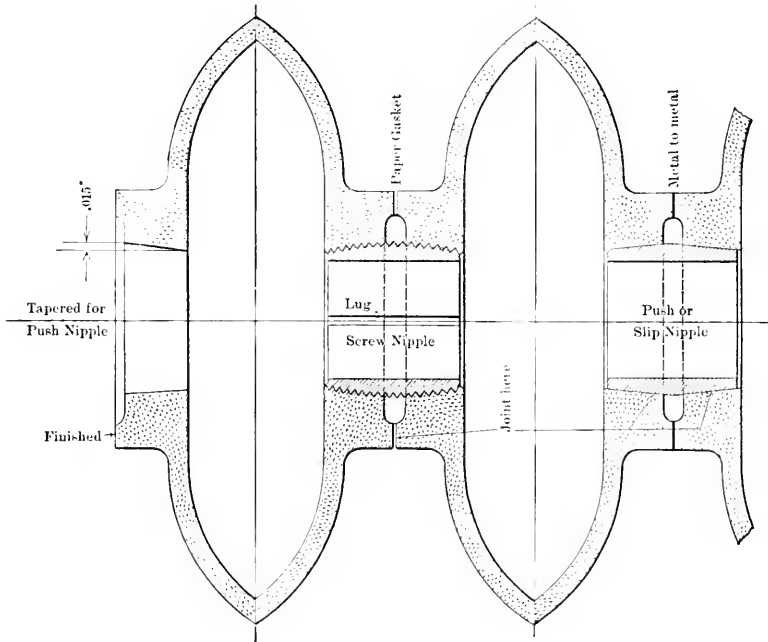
SECTION THROUGH RADIATOR HUBS SHOWING METHOD OF MAKING JOINTS.
